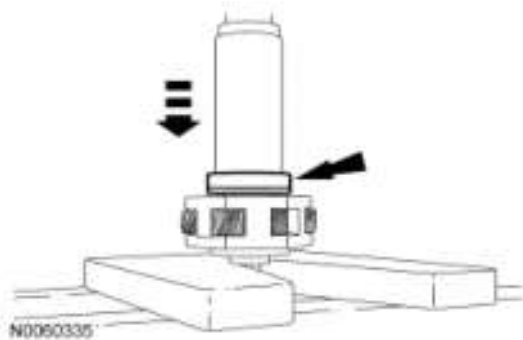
Installing Planetary Gear Carrier Support Bearing Using A Suitable Press
